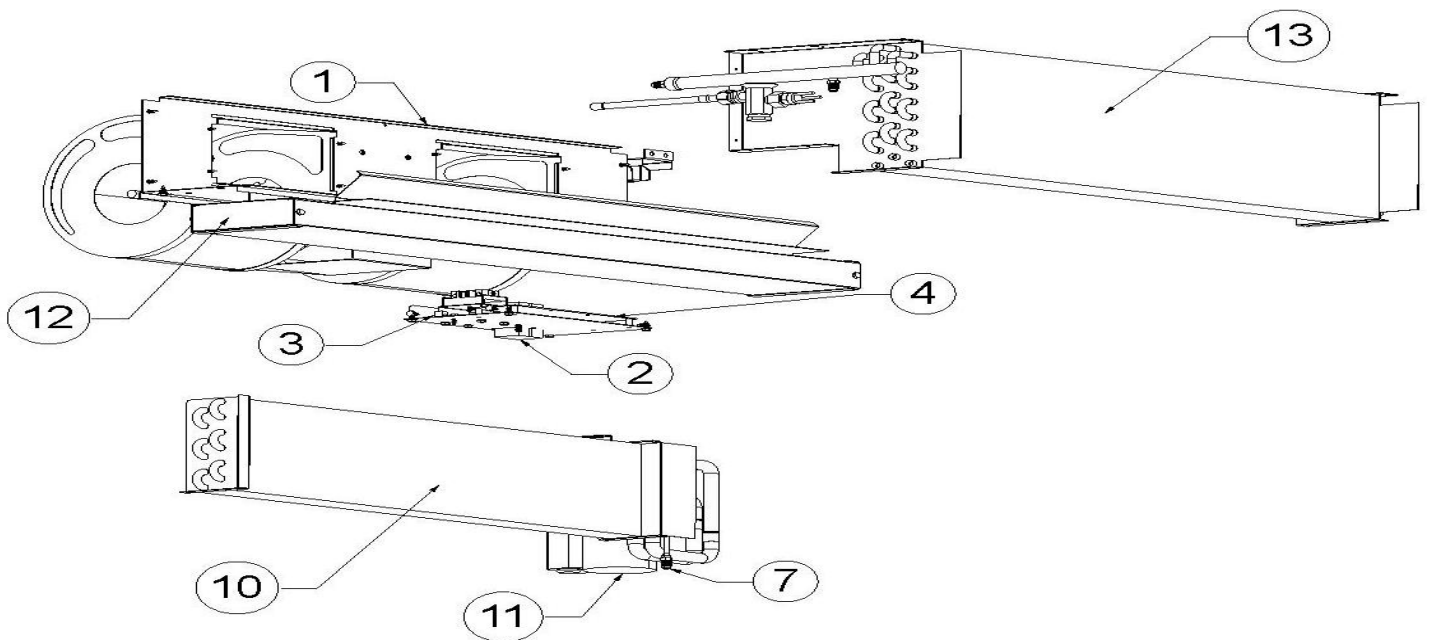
SDXW/ CDXW/ SCWW/ CCWW 36-37 Hydronic Heat Air Handler Unit Repair Parts Schematic W/ Constant Torque Blower Motor
